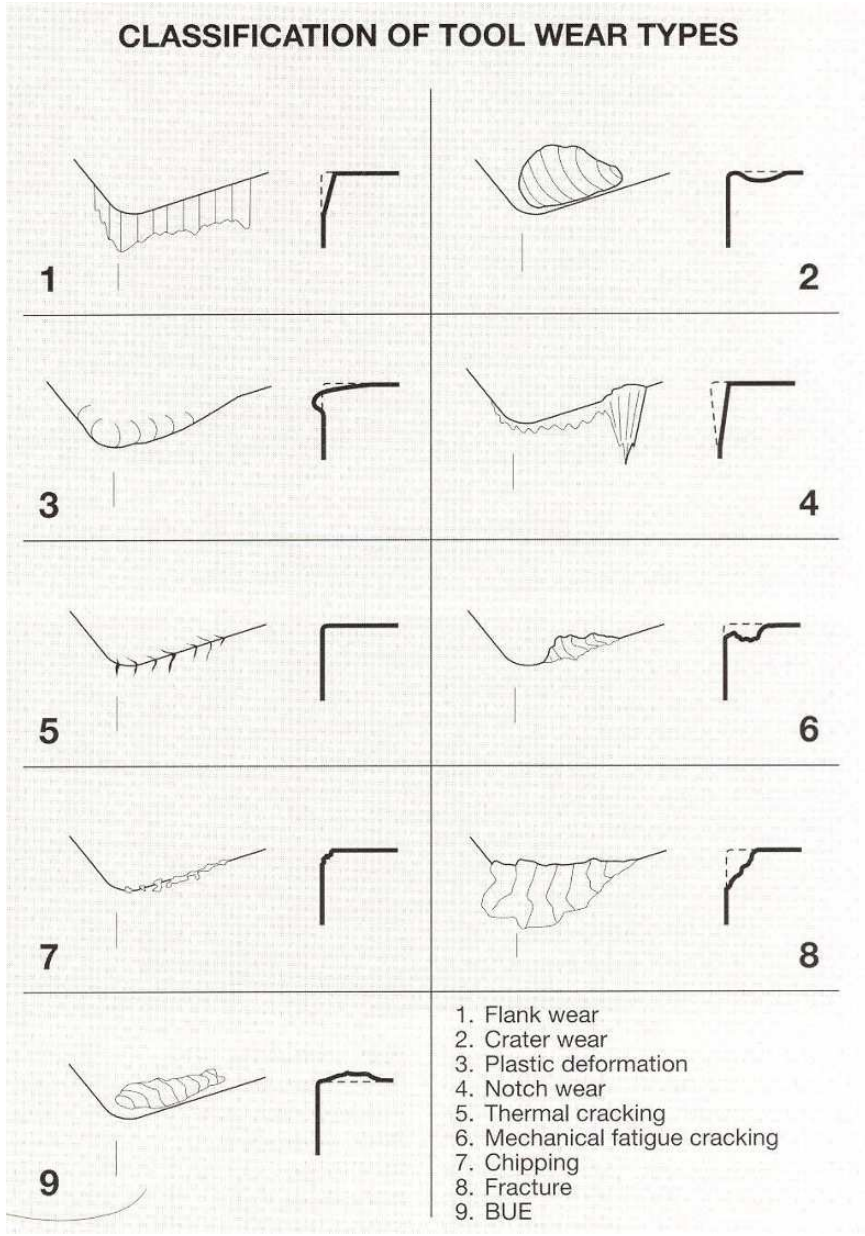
Classification of cutting tool wear caused by a combination of different tool wear mechanisms
